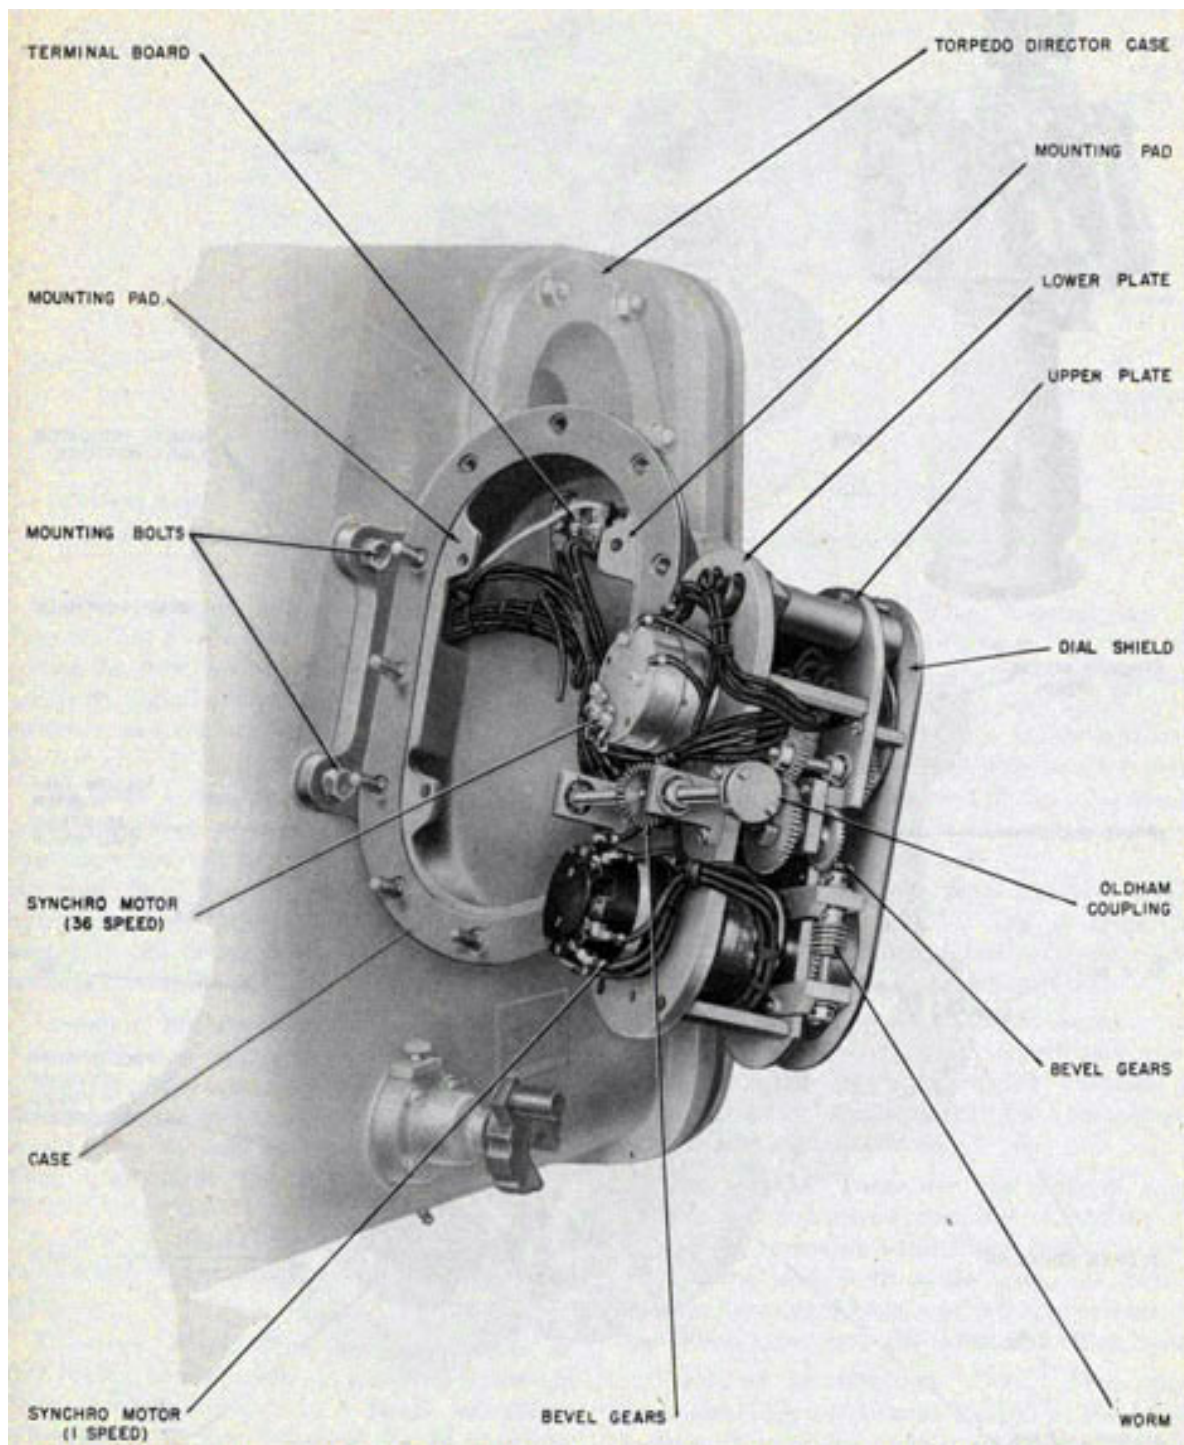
Internal lighting type bearing receiver partially removed from case to show wiring and shaft connection to computer mechanism.
